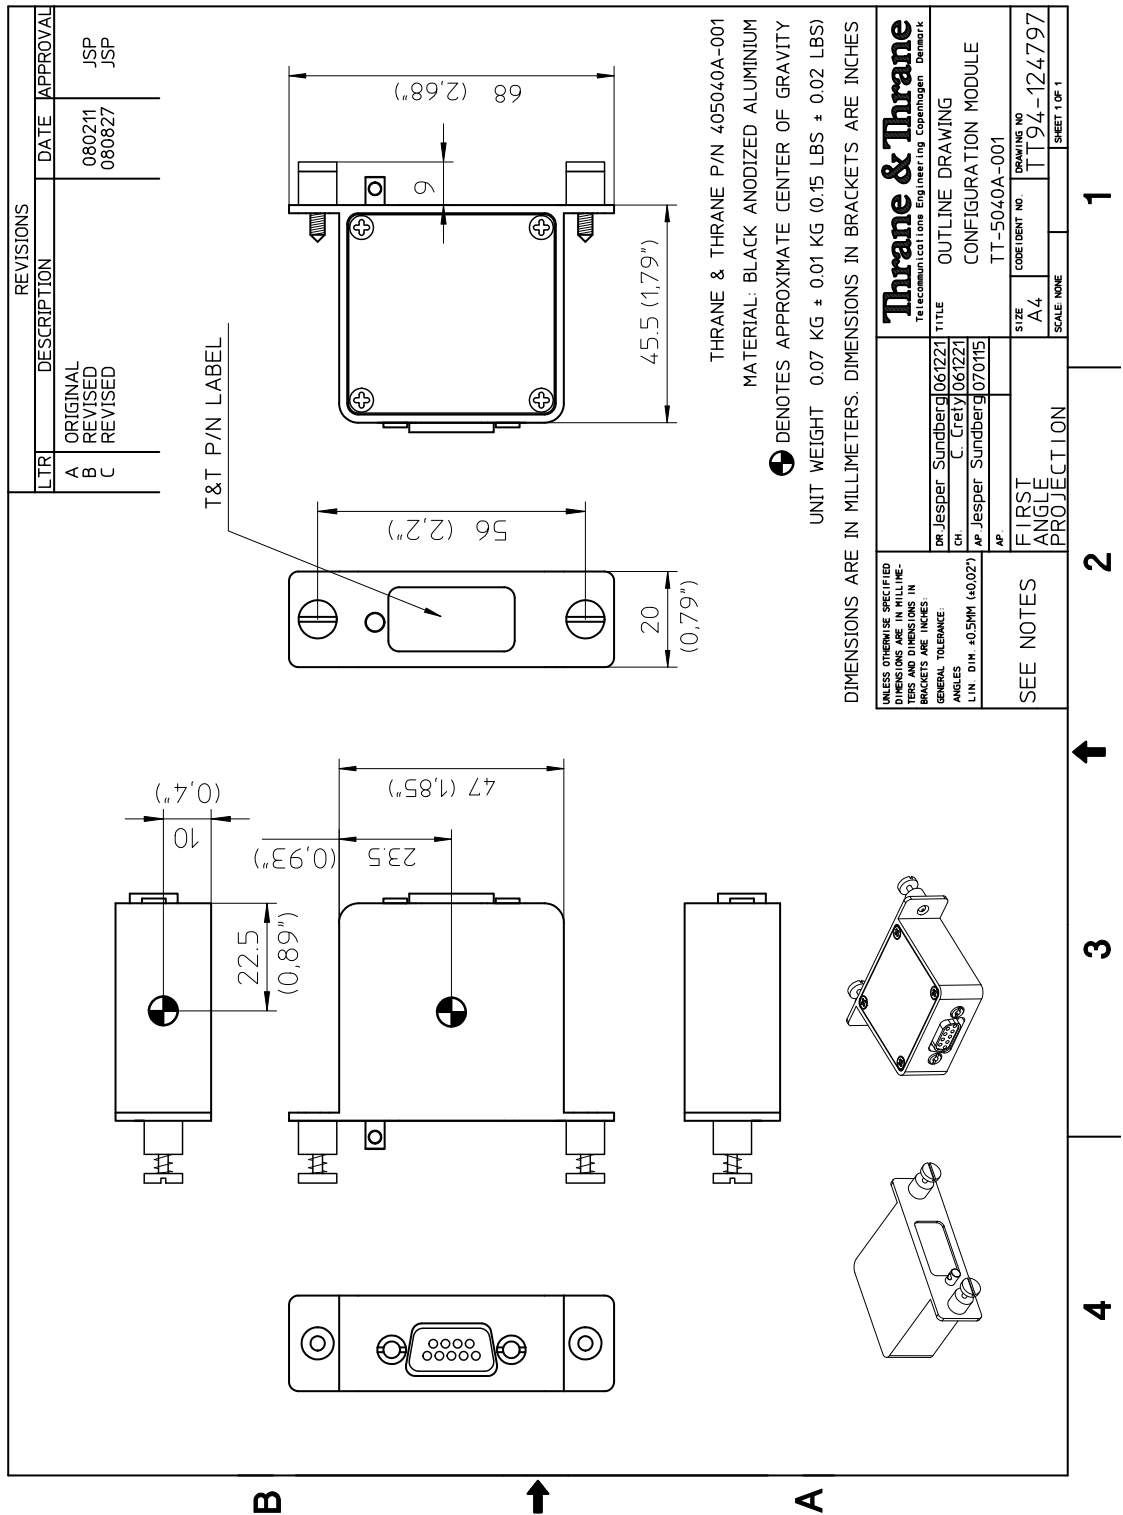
Outline drawing: TT-5040A-001 CM, inserted in the SBU
